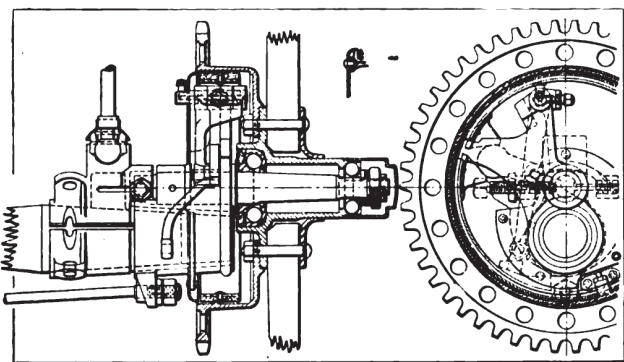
Rear wheel, sprockets, brakedrum, showing ball bearings, and system of protection against silt of the road
